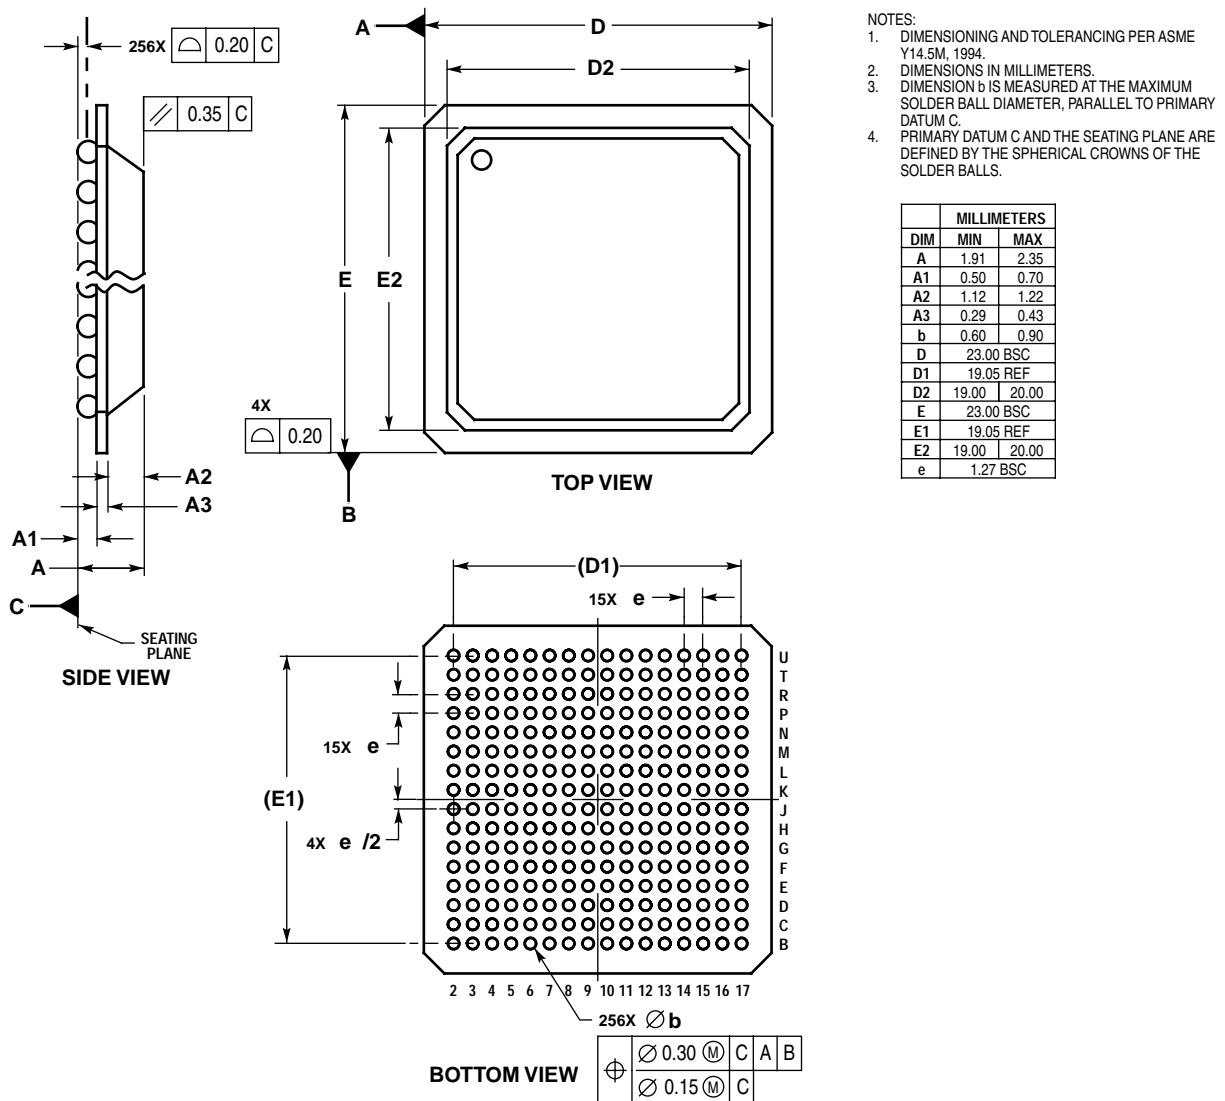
shows the non-JEDEC package dimensions of the PBGA.
